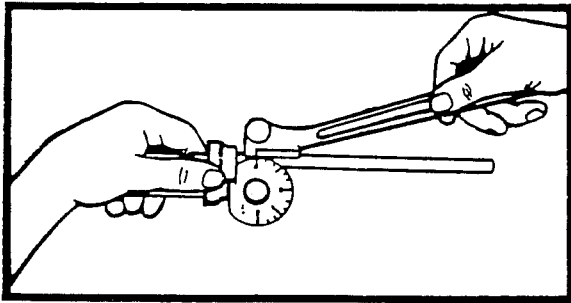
Drop clip over tube and turn handle slide bar about its pin and press to the right as shown. Note that zero mark on bending form will coincide with mark on slide bar.
